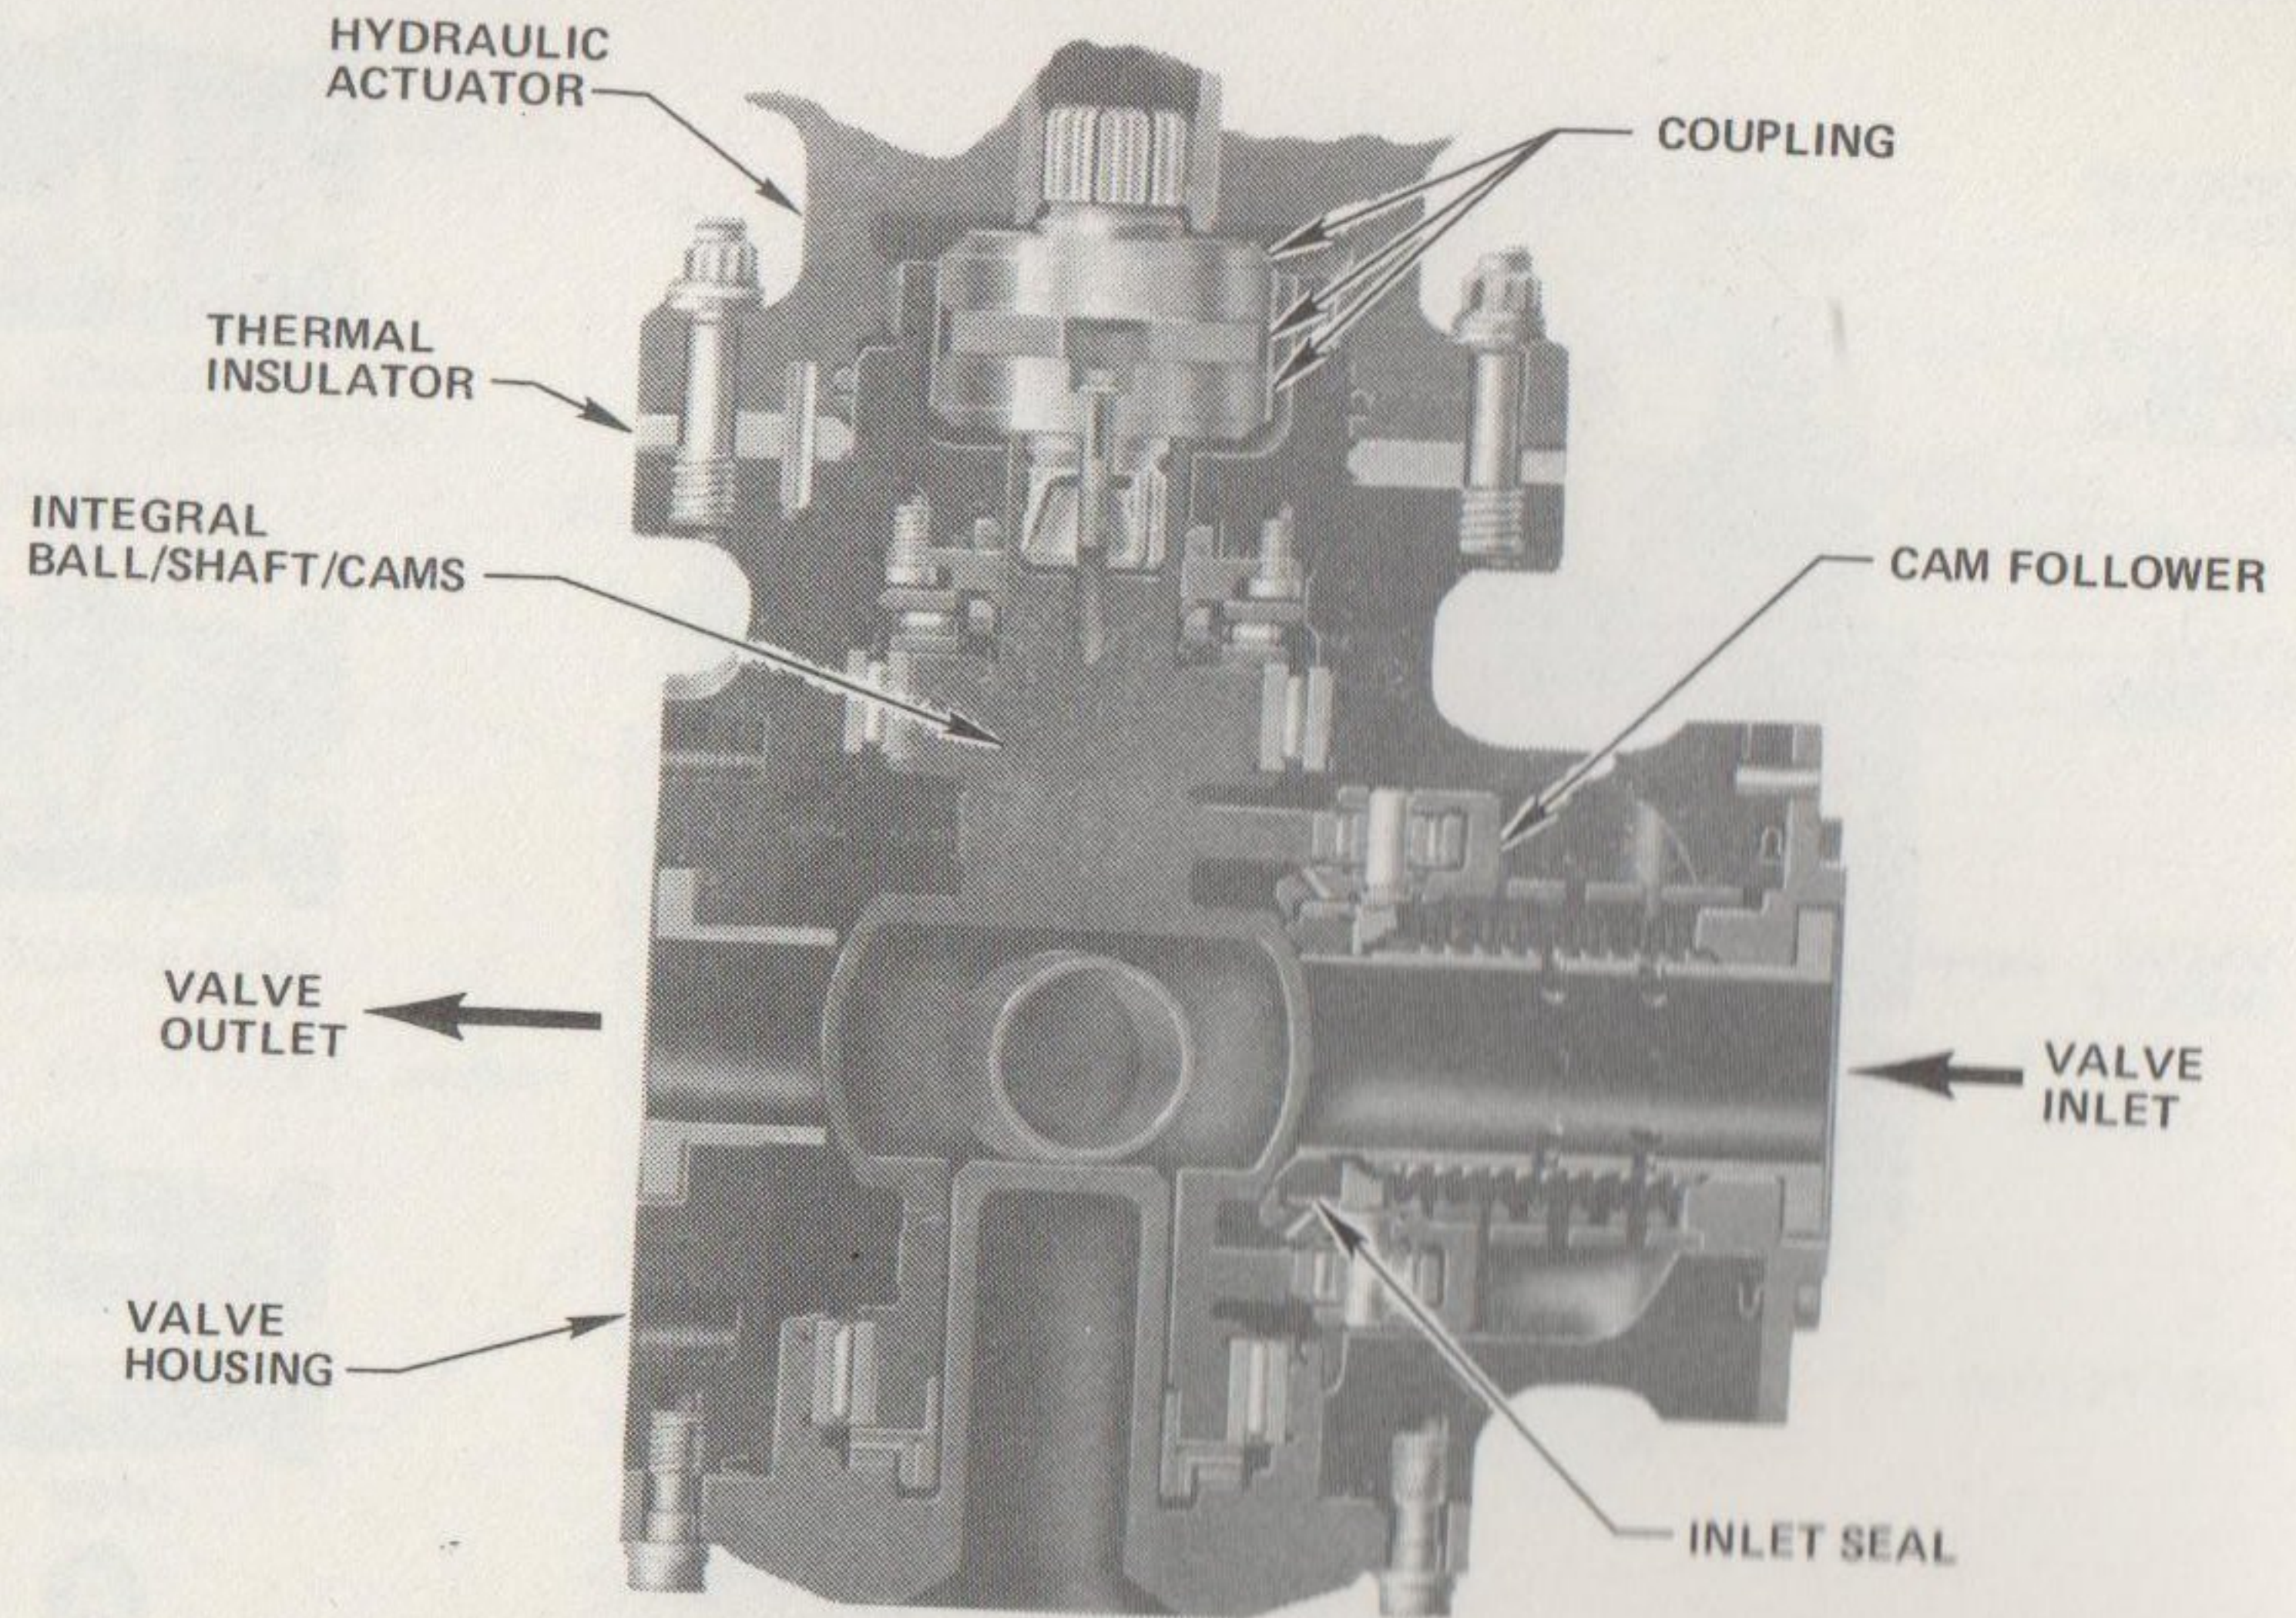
FUEL PREBURNER OXIDIZER VALVE
